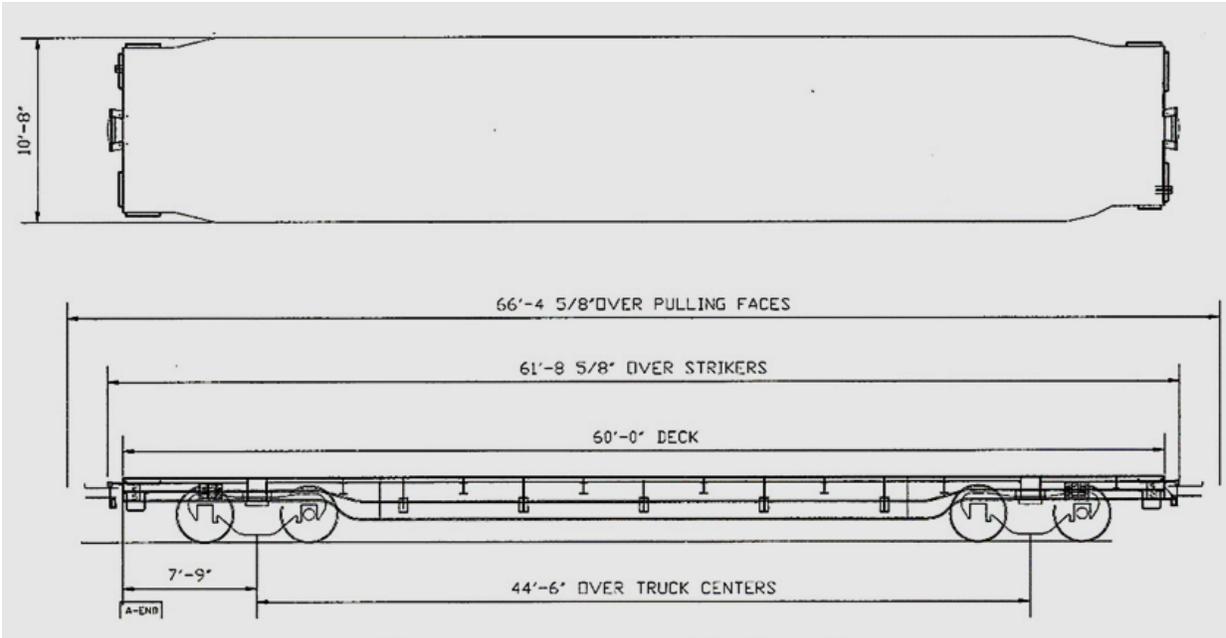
IDOX 20001, 20002 Buffer railcar arrangement drawing
